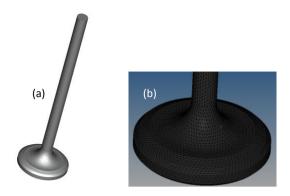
(a) ProE design views; (b) Meshing of conventional exhaust valve
